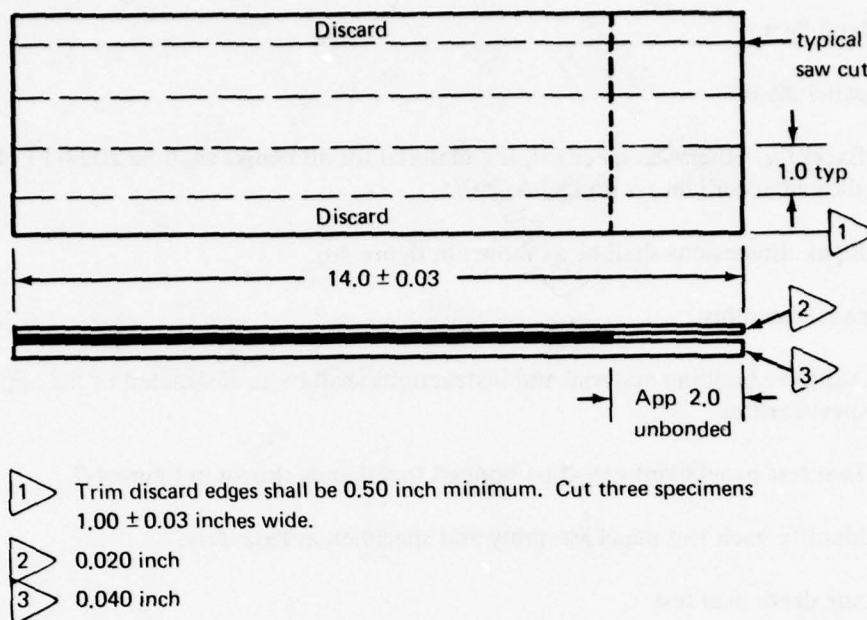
Metal-to-Metal Peel Test Panel Assembly and Specimen
